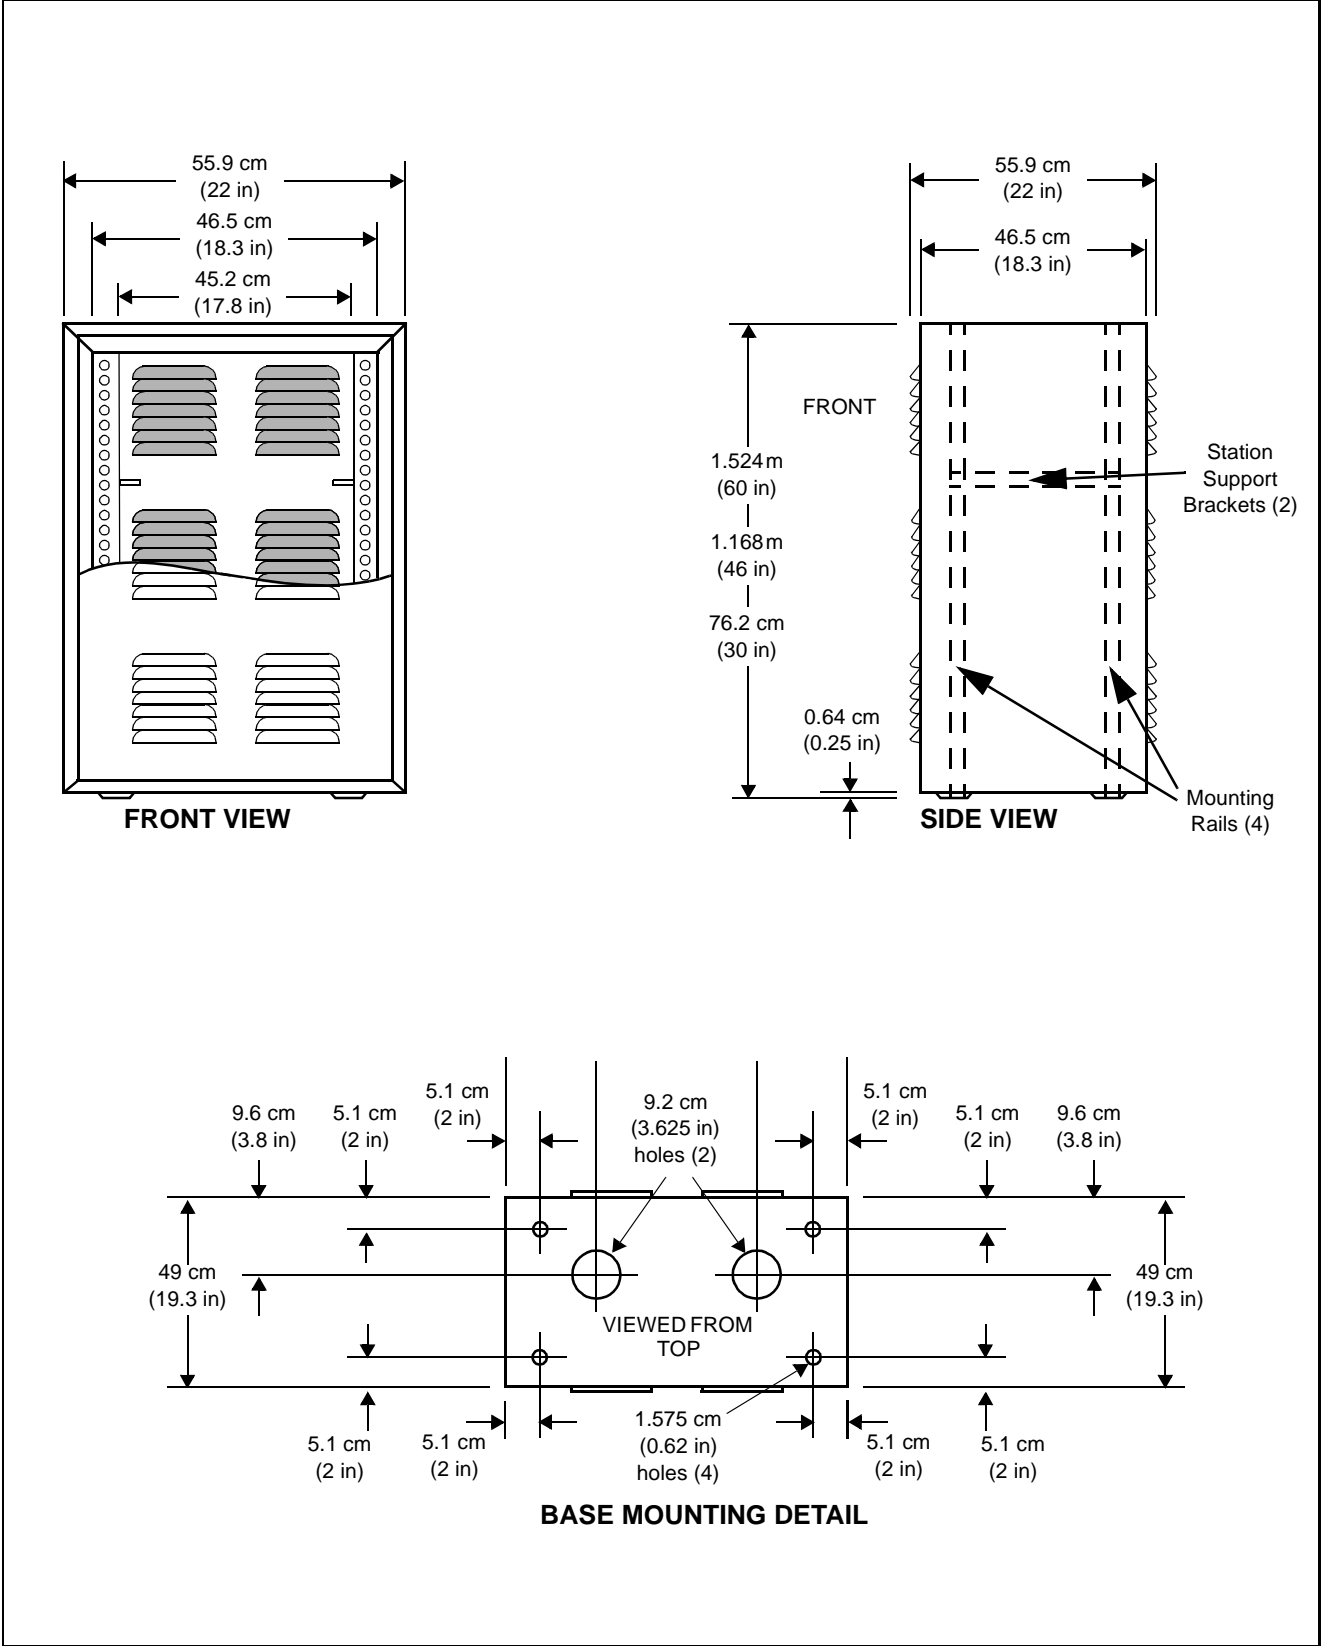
Floor-mount Cabinet - Dimensions and Clearances
